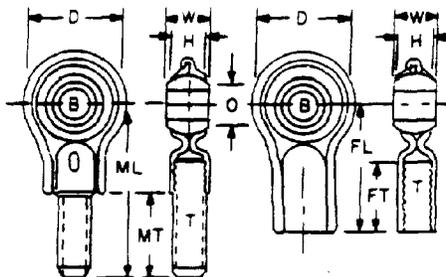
TYPE D RACELESS STAMPED HOUSING
